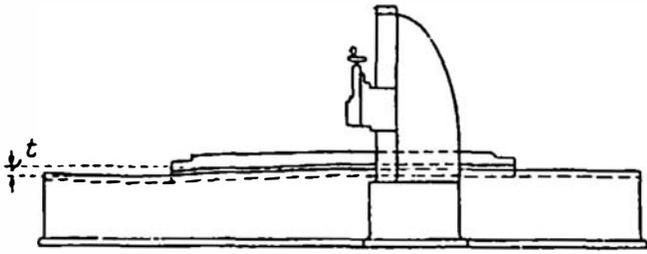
Tolerances in Measuring the Difference of Height or Sag of a Planer Bed
